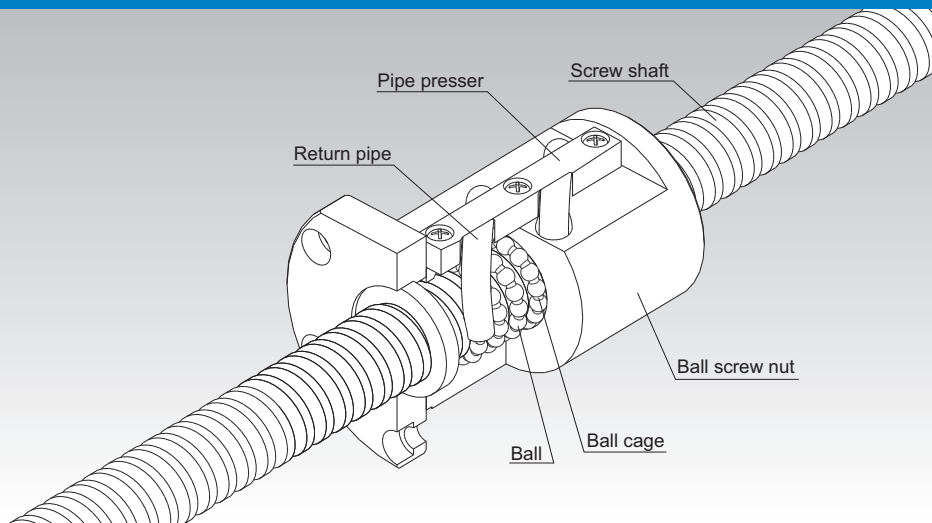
Structure of High-Speed Ball Screw with Ball Cage Model SBN
